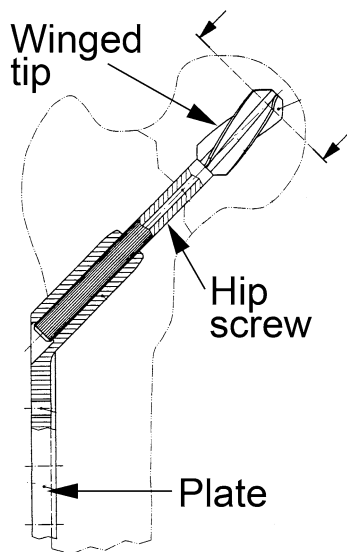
Device for attaching fractured hip joint heads incorporating a multi-pitch thread at the tip of the head component. Rotation of the femur head is prevented due to the steep spiral angle of the “wings”
